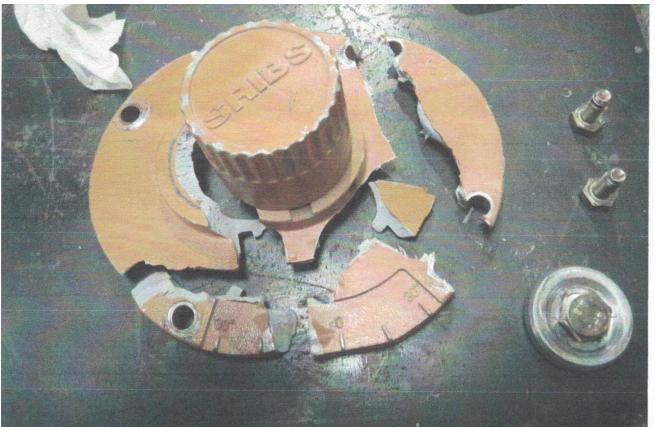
Top failed aluminum casting pieces, heavy steel washer deformed with failed bolt sitting in washer.
